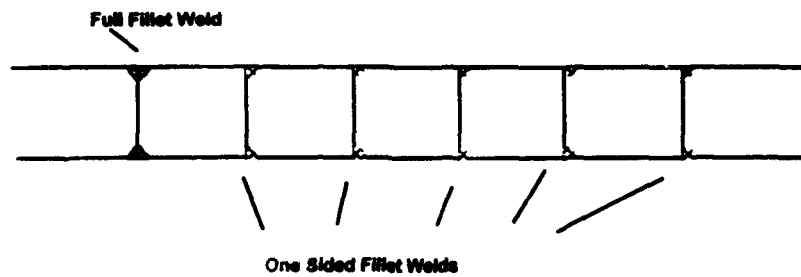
Fillet Method of Welding the USDH Model.
